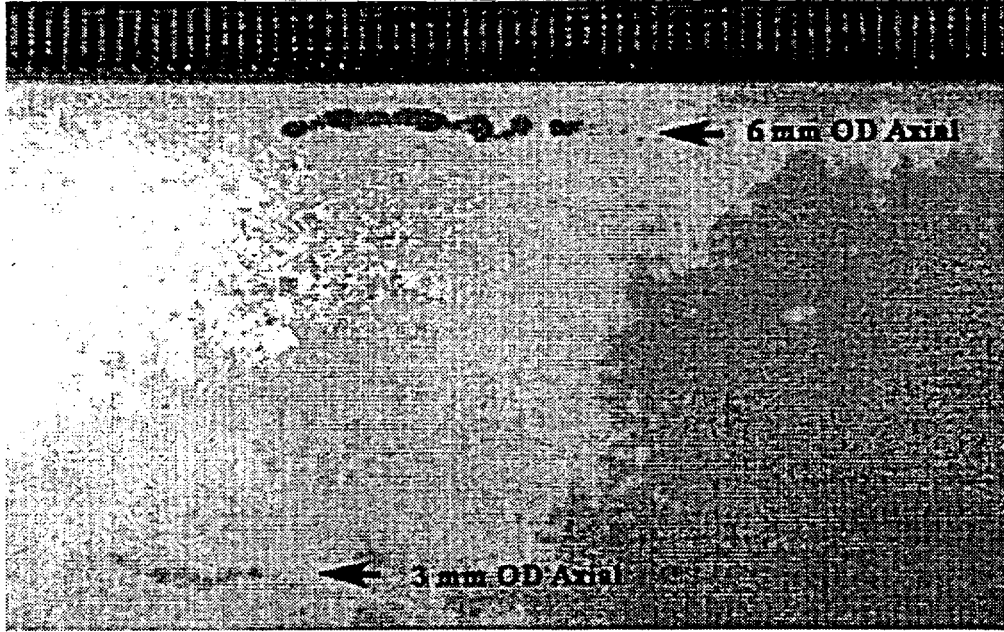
Dye-penetrant examination of Specimen SGL288 showing two axial cracks.
